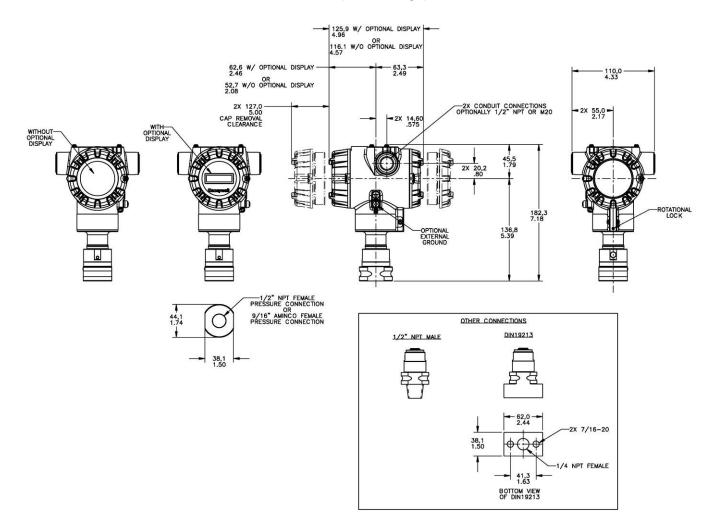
Typical mounting dimensions of STA72L, STA74L, & STA77L for reference
